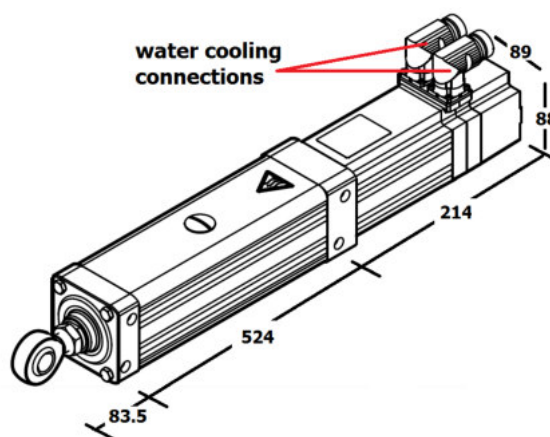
Electric cylinder CMS63 with dimensions in millimeter for the 400 mm stroke length version [SEW09].
